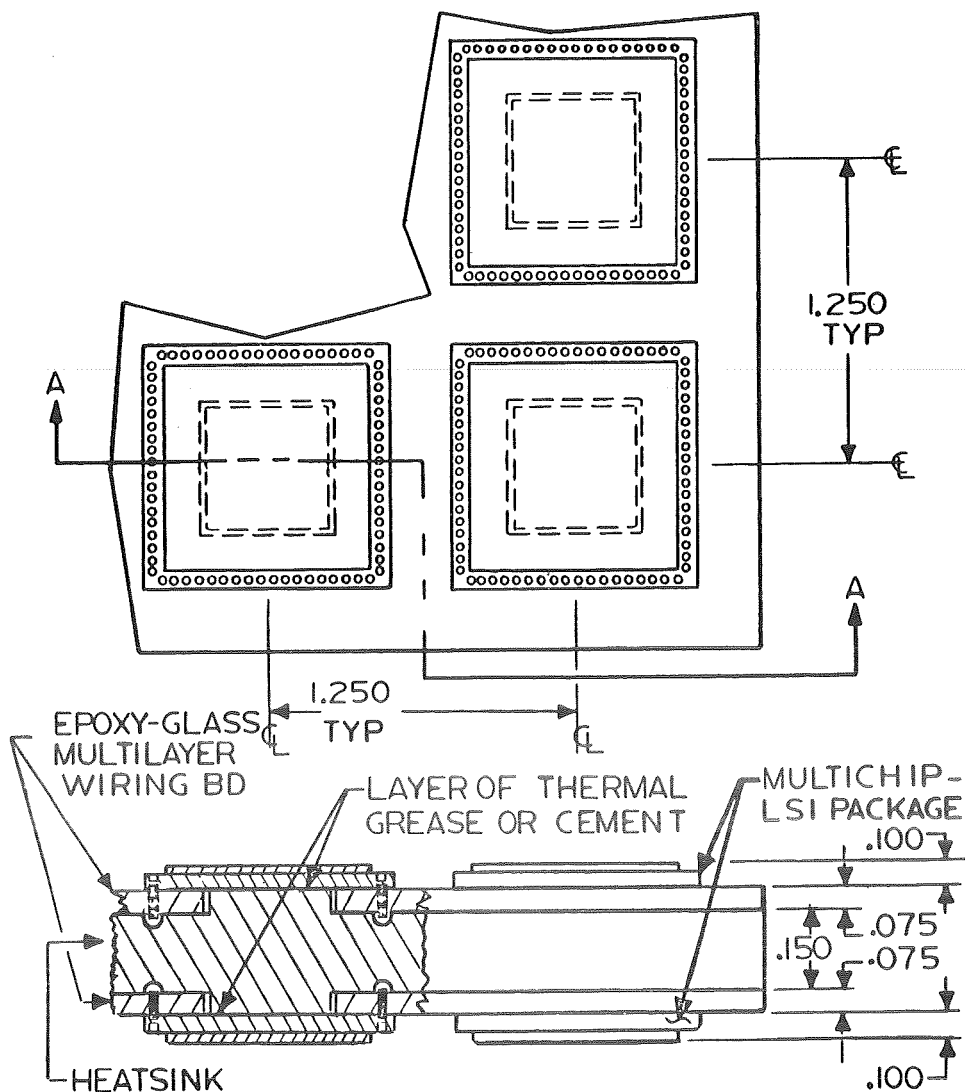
Multichip-LSI packages soldered directly into an epoxy-glass multilayer wiring board.
